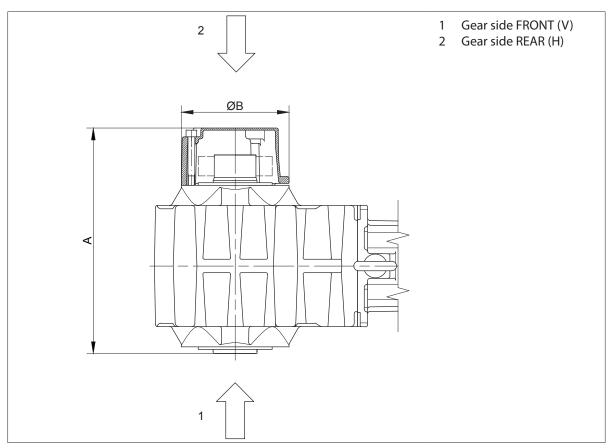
SSV cover for bevel gearbox BK10 ... BK90
